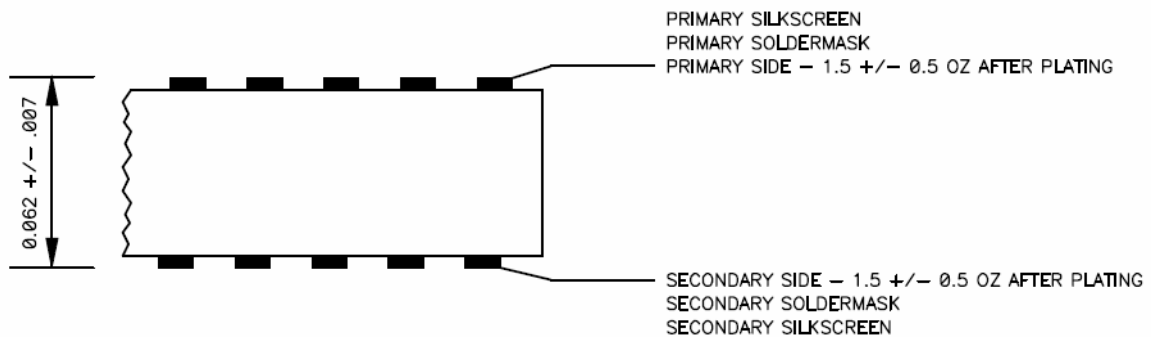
Two-Layer PCB Layer Stackup for Crystal (Side View)
